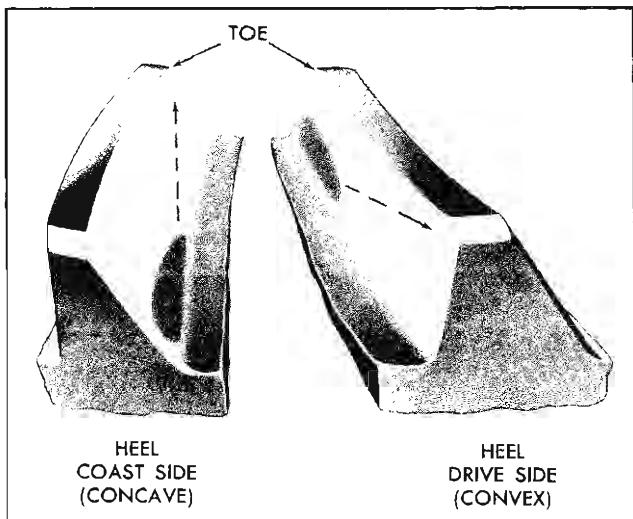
Direction of Tooth Contact Movement—Decreasing Shim Pack
